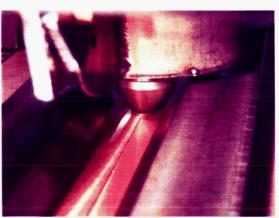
Demonstration of GRCop-84 thin plate friction stir welding.
